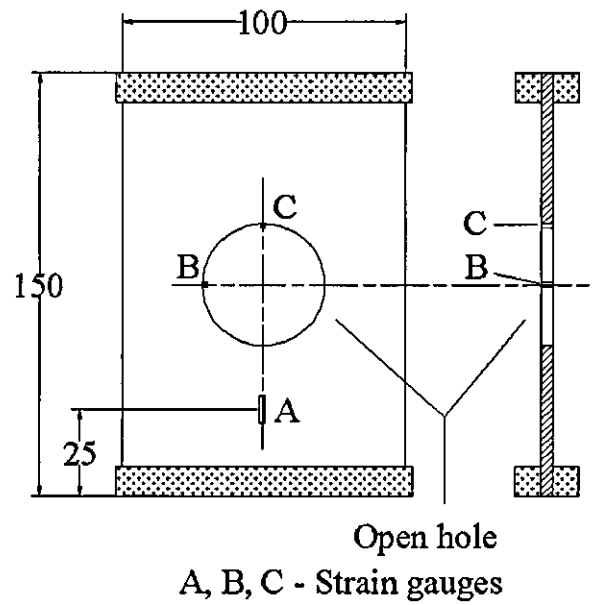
Strain gauge locations for in-plane compression specimens with open hole.
